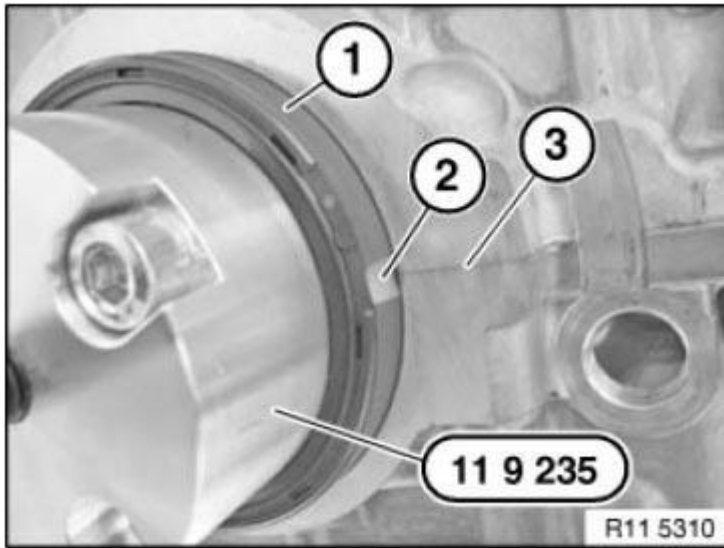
Identifying Radial Shaft Seal, Housing Partition And Groove
